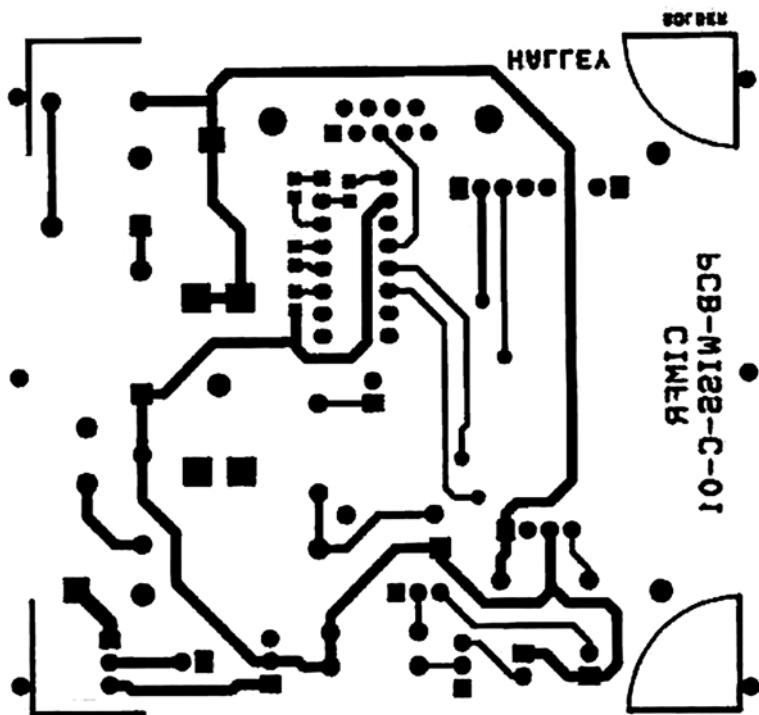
PCB bottom layer of RFID part of coordinator
